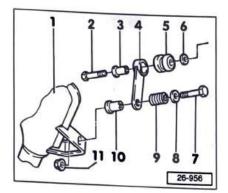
Three way catalytic converter mounting parts, left-hand side
